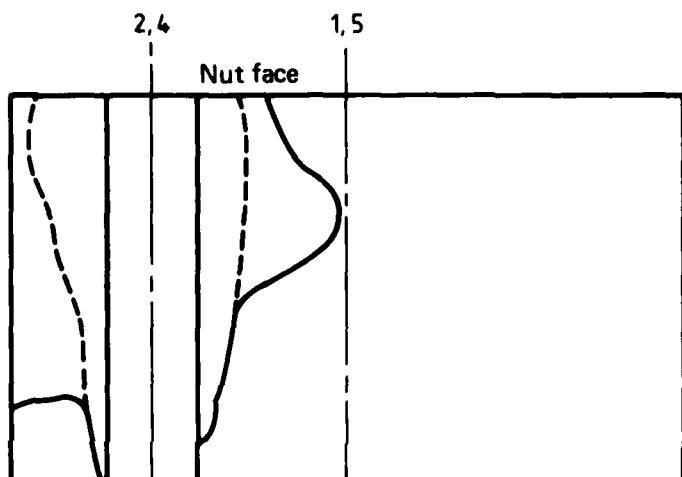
(c) FRACTURE SURFACES: SPECIMEN TYPE (C)
